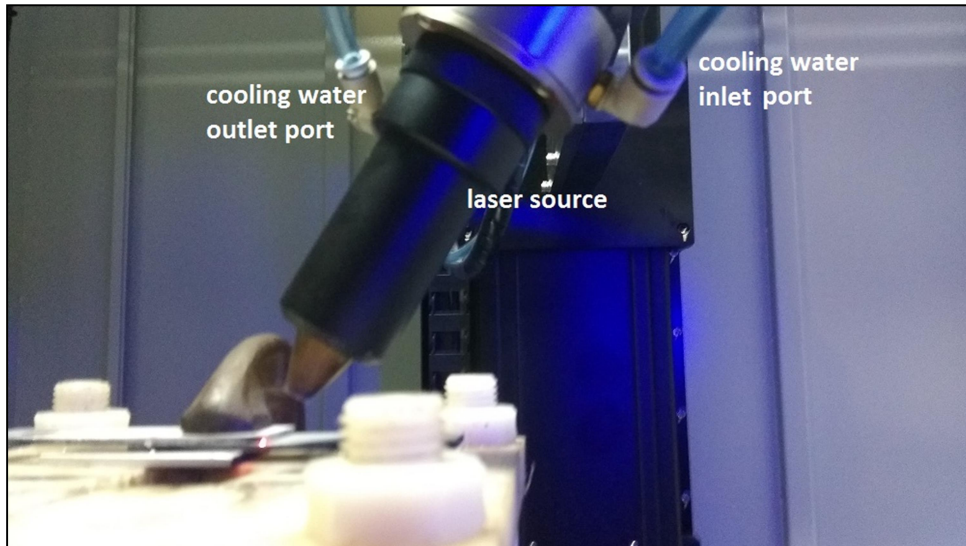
Pictorial view of lap welding of Aluminium 2024 alloy
